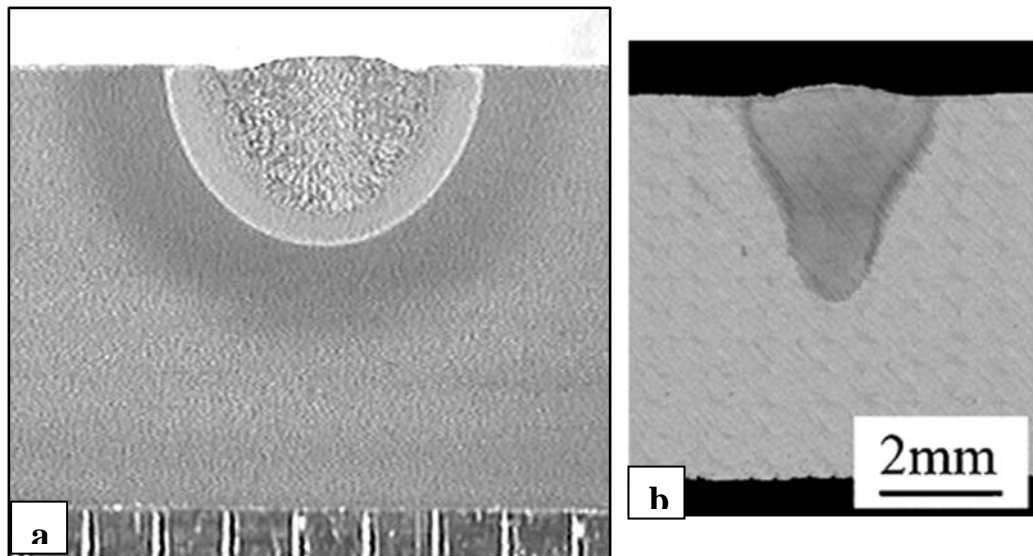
Marographs showing the different shape of laser welds deposited onto mild steel without filler material employing following parameters: a – 3 kW diode laser power source; Travel speed = 400 mm/min; Base metal thickness = 9 mm. Note: Scale is in millimetres; b – 4.5 kW CO₂ laser power source; Travel speed = 800 mm/min; Base metal thickness = 7 mm.
